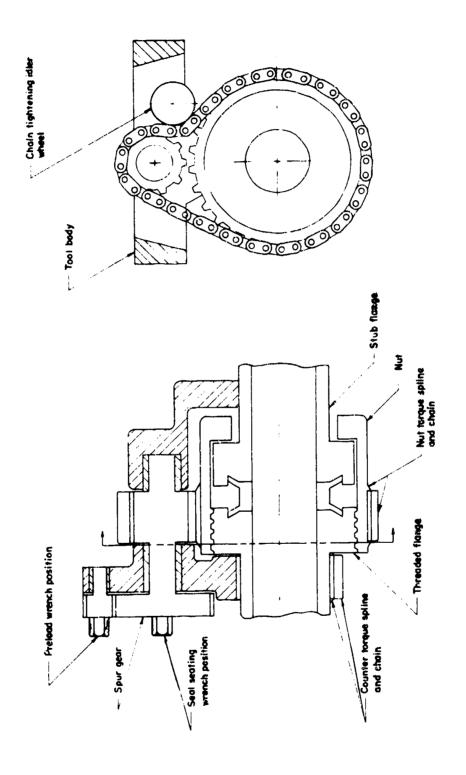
SPECIAL TOOL FOR REDESIGNED THREADED-FLANGE CONNECTOR
